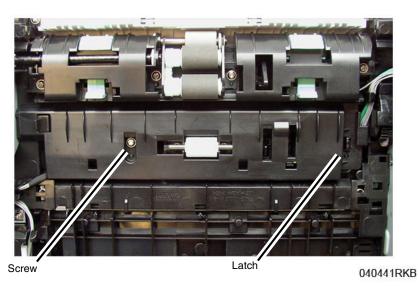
Feed and Reg Sensors PWB Cover (Bottom View)
